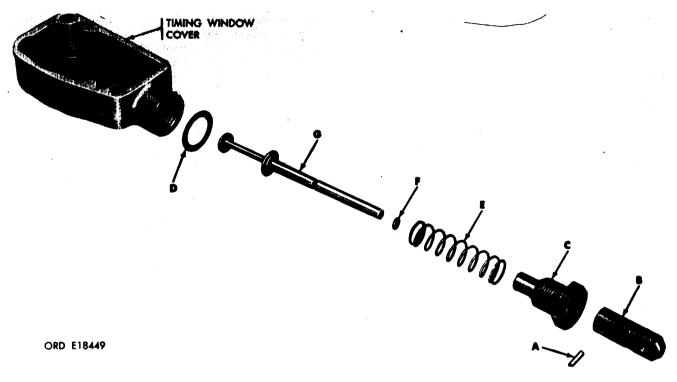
Disassembling or assembling timing window cover and fuel shutoff rod assembly.
